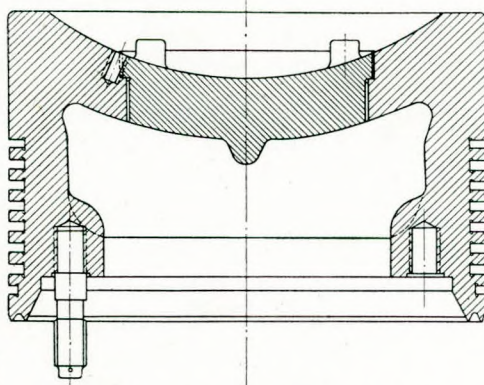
Piston with a threaded plug of nickel cast iron.
